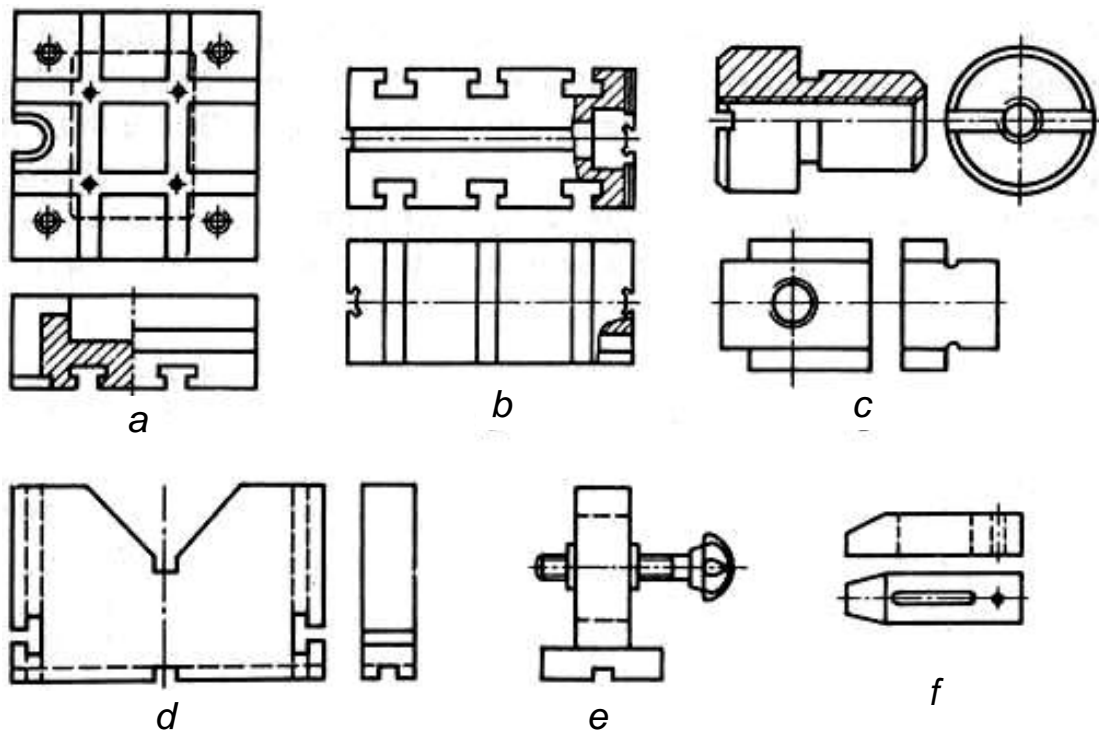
Representative parts of modular jigs: a – locating elements; b – housing elements; c – mounting elements; d – guide elements; e, f – clamping elements
